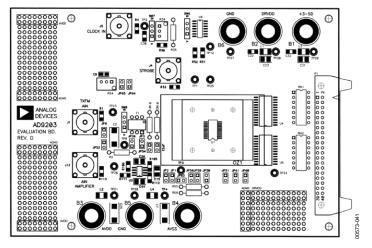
Evaluation Board Component Side Assembly (Not to Scale)
